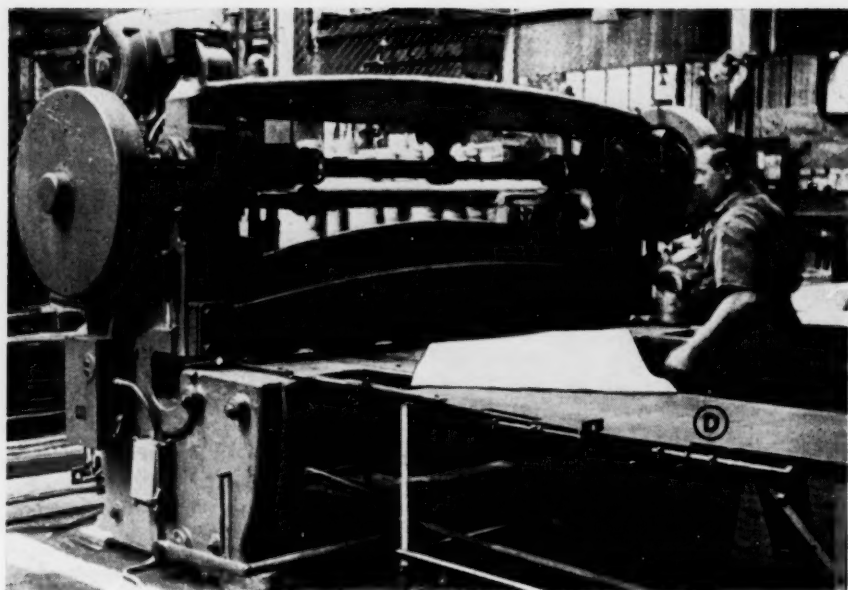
Front view of shearing machine. A wire mesh guard (not readily visible) is bolted in front of the blade in such a manner that sufficient space is provided beneath it to allow buckled sheets to pass through the machine yet the operator's fingers are prevented from getting under the blade.
